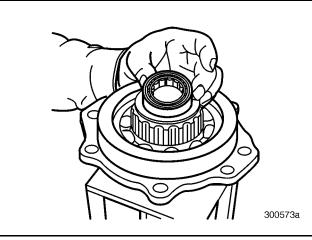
Spigot Bearing Removed from Main Drive Pinion Shaft
